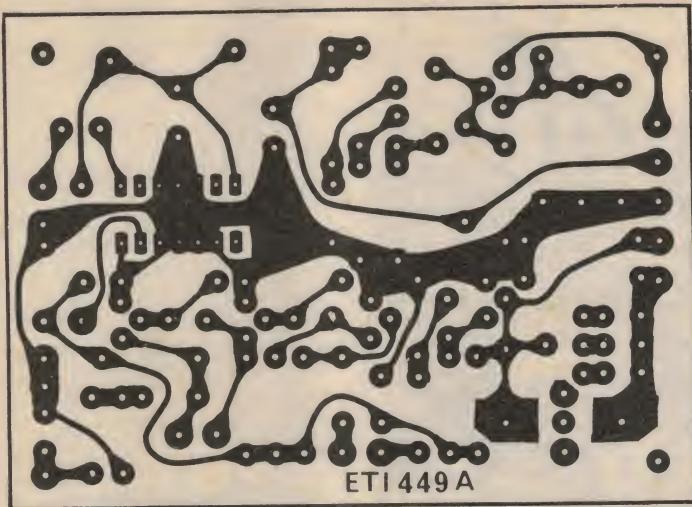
Printed circuit layout. Full size 90 x 65 mm.
